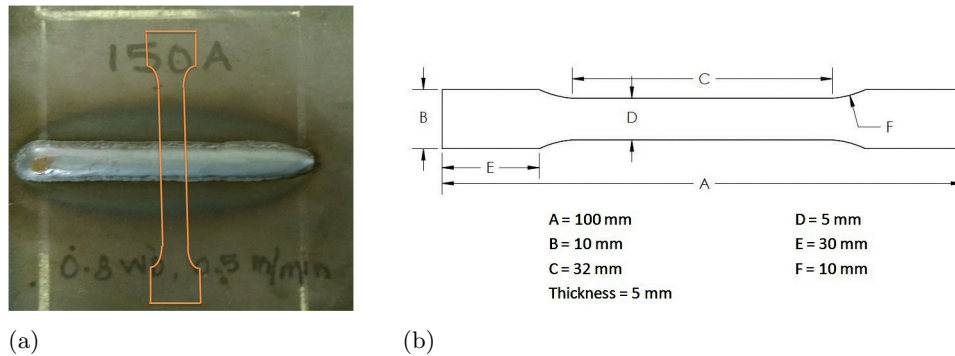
Specimen geometries used for characterisation (a) orientation of the specimen with respect to the weld (b) dimension of the tensile specimen.
